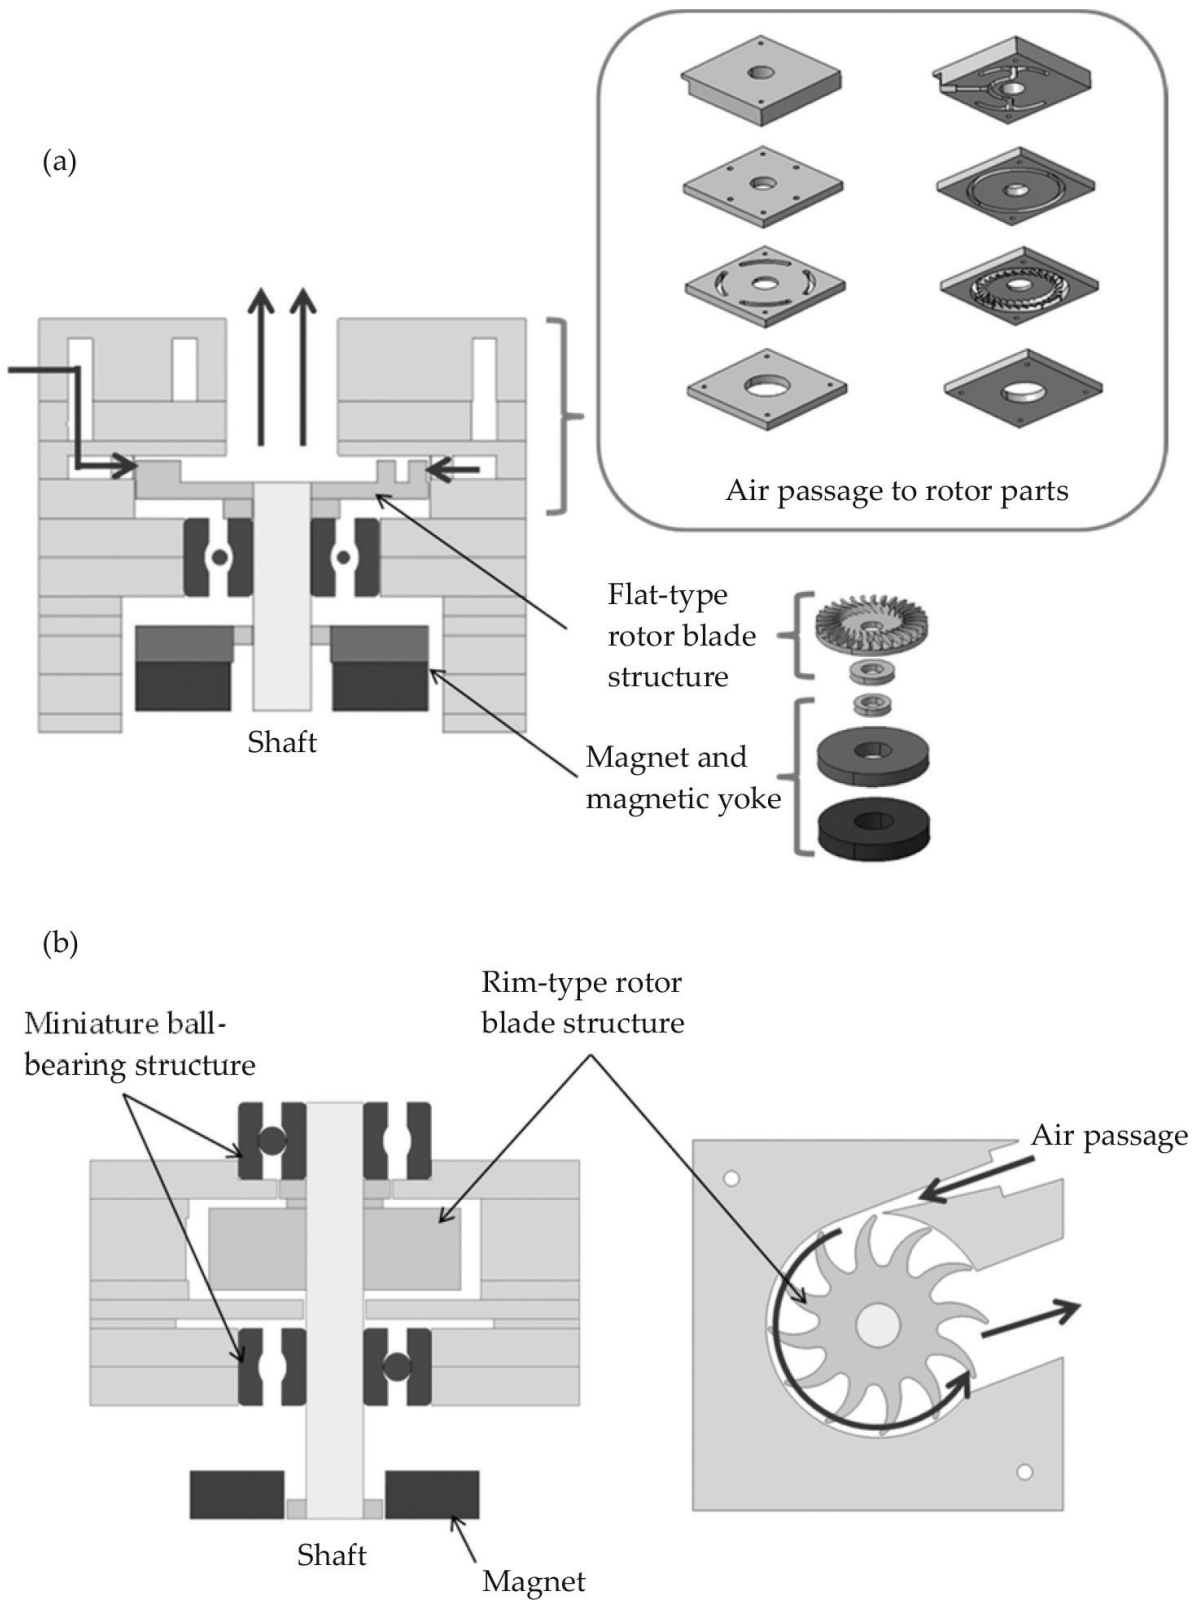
Design of MEMS air turbine structures (a) flat-type rotor blade and miniature ball bearing and (b) rim-type rotor blade and miniature ball bearing.
